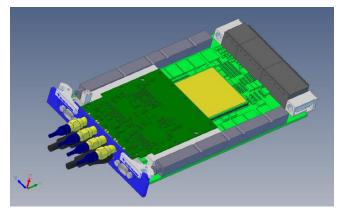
SpaceVPX-RTG4 Board CAD Model with FMC Card Fitted
